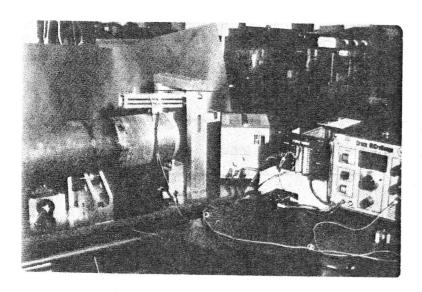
Computer controlled inspection rig for crack detection and sizing in the threaded end of tubular steel components (tethers)
